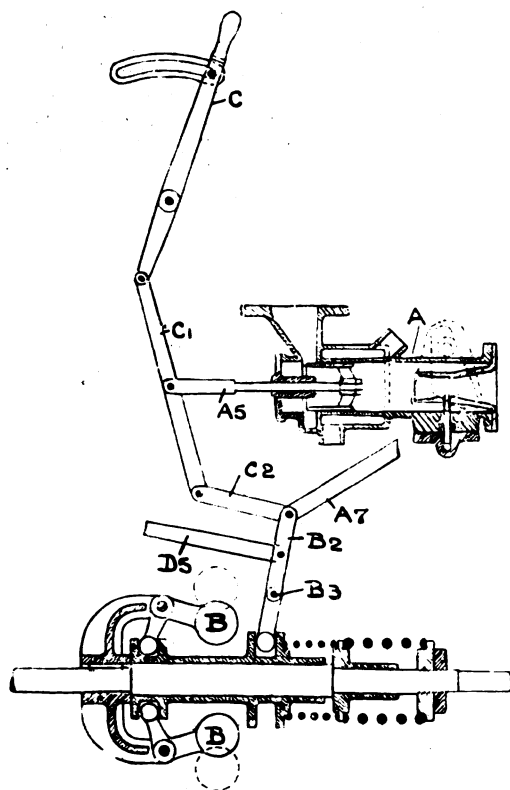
Diagram of the Albion Control System, showing the interconnections between the Governor, Throttle, Auxiliary Air-Valve on Carburettor, and the "Timing."
